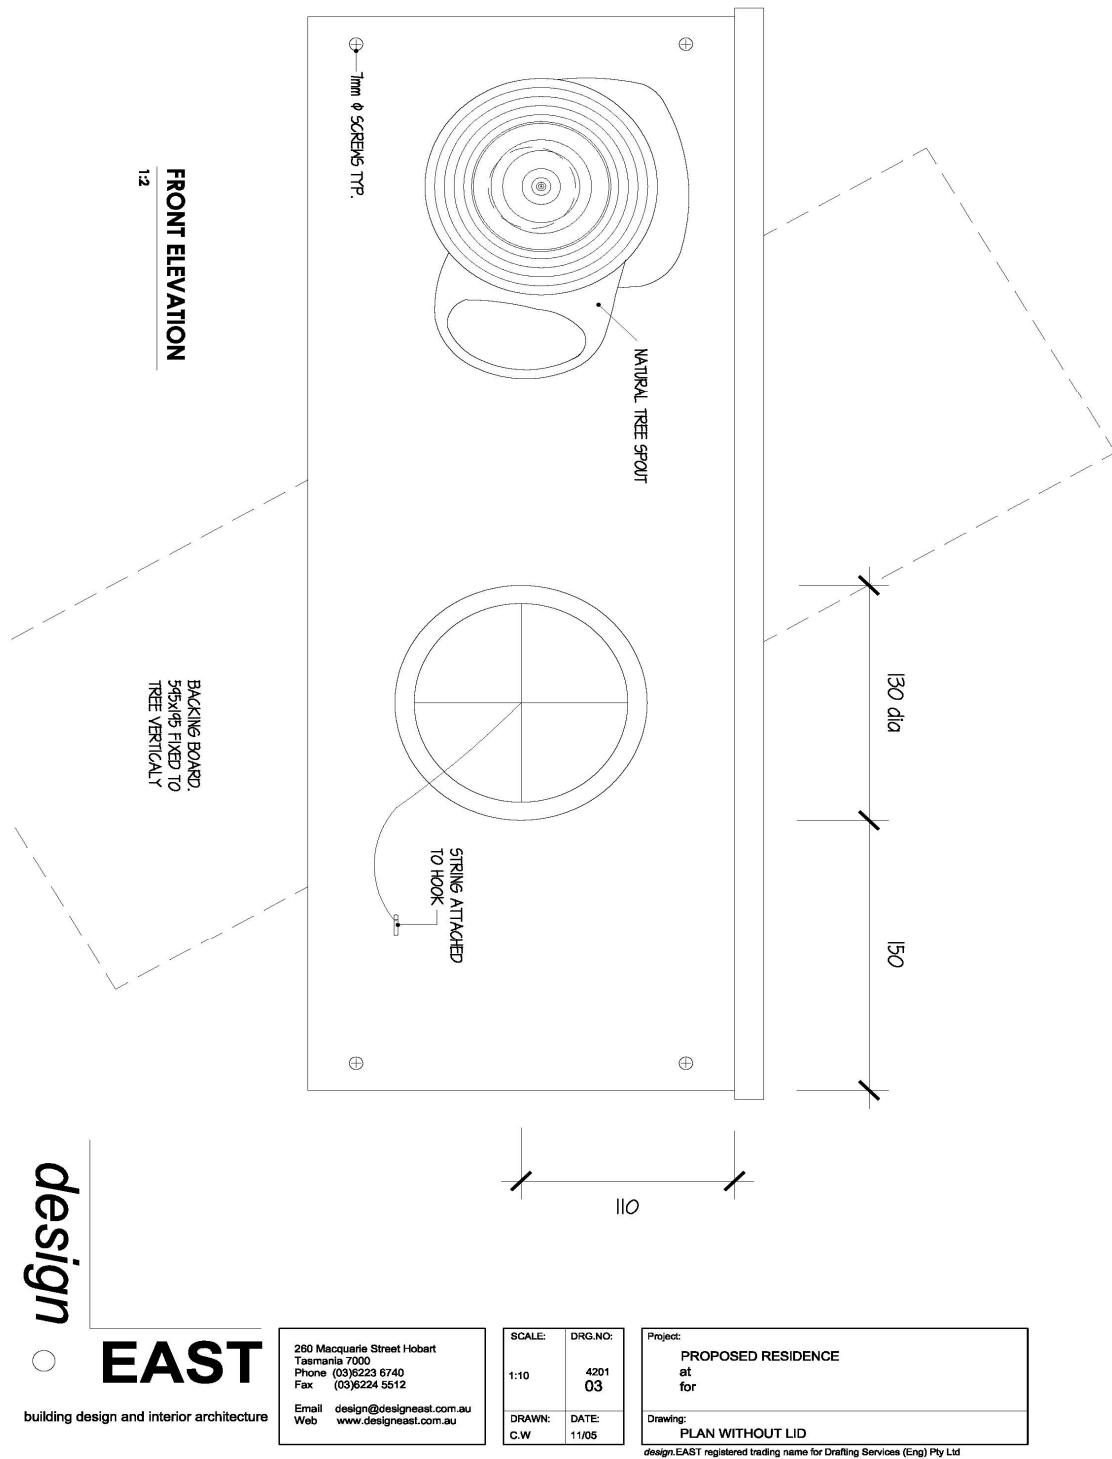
Front elevation of Orange-bellied Parrot nest box.
